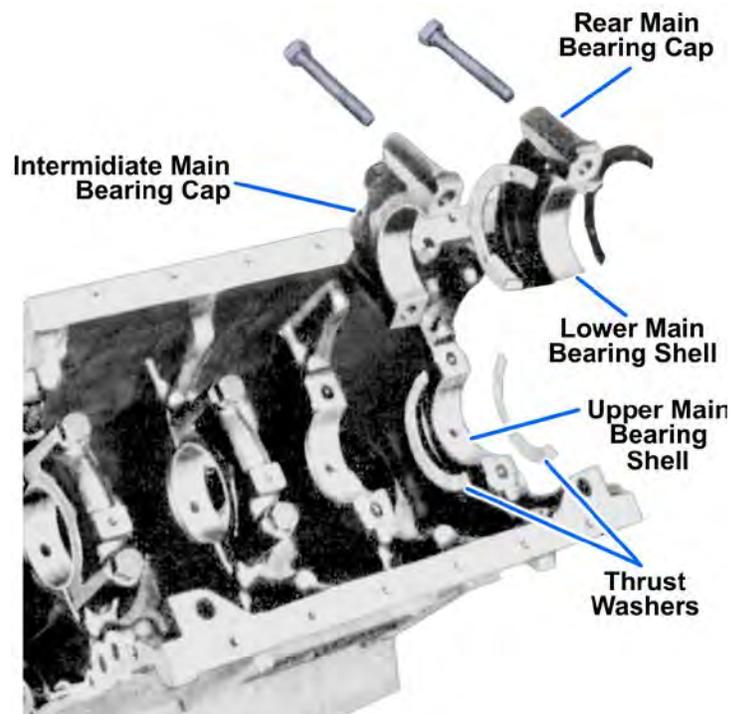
Upper and lower main bearing shell, bearing caps, and rear main bearing thrust washers.
